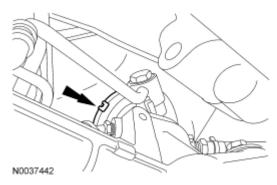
Locating Splash Shield Bolts Courtesy of FORD MOTOR CO.
